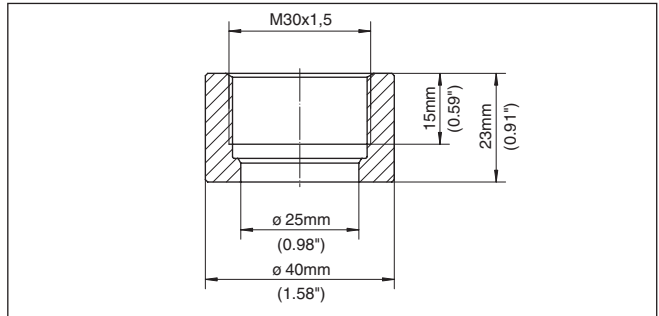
Dimensions of welded socket, M30 x 1.5
